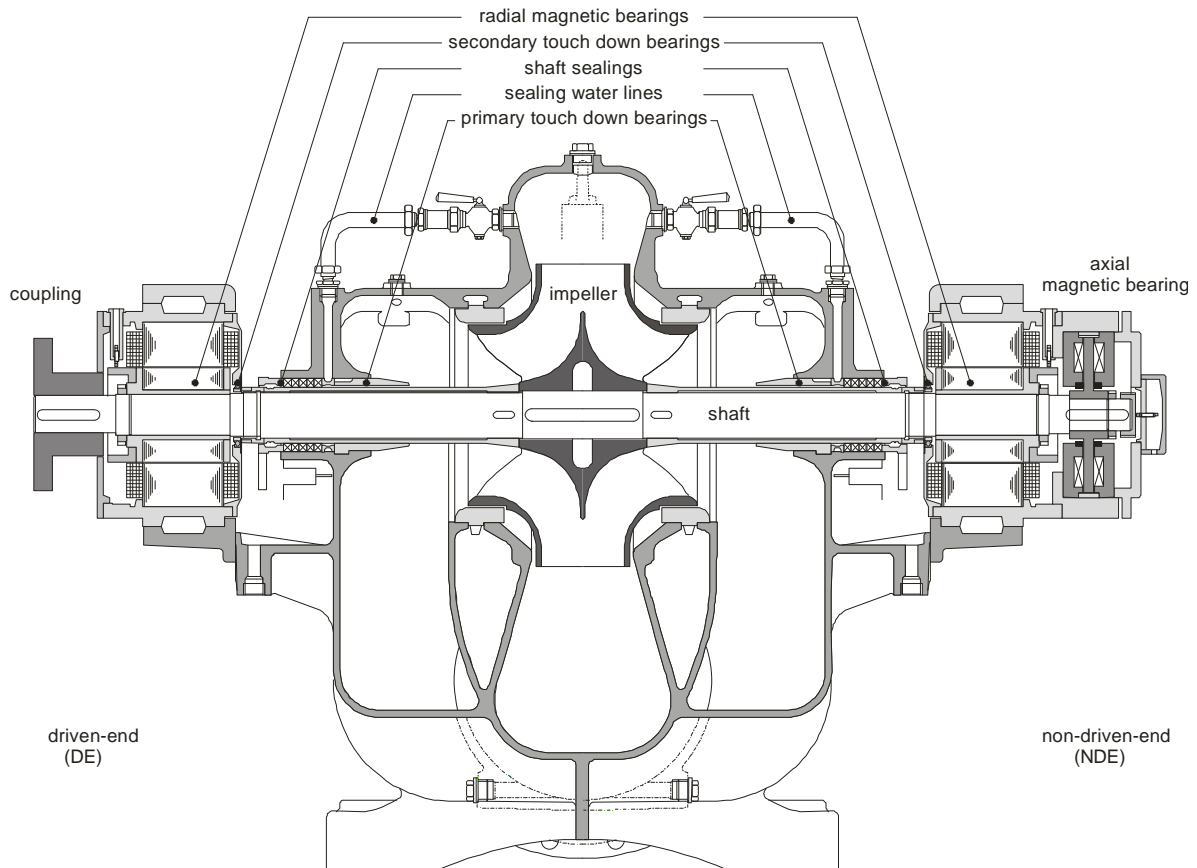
Sectional view of the cooling water pump SM 400/400 A with active magnetic bearings
